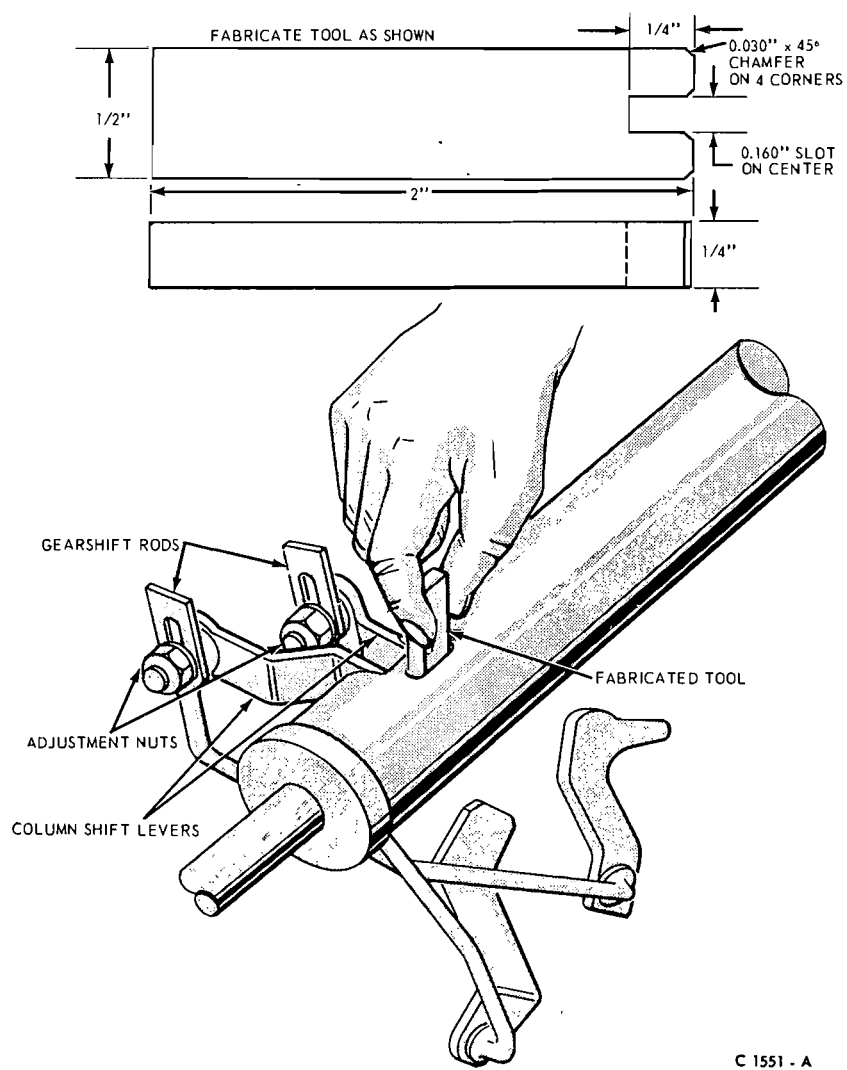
Mercury Intermediate, Falcon and Fairlane Gearshift Linkage Adjustment
